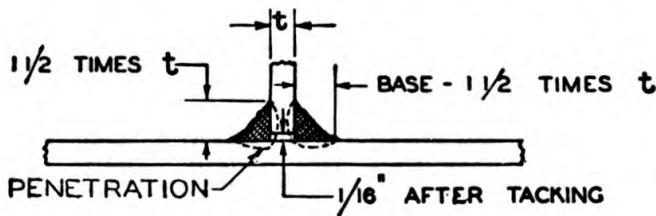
Weld metal specifications for fillet tee and angle joints.
